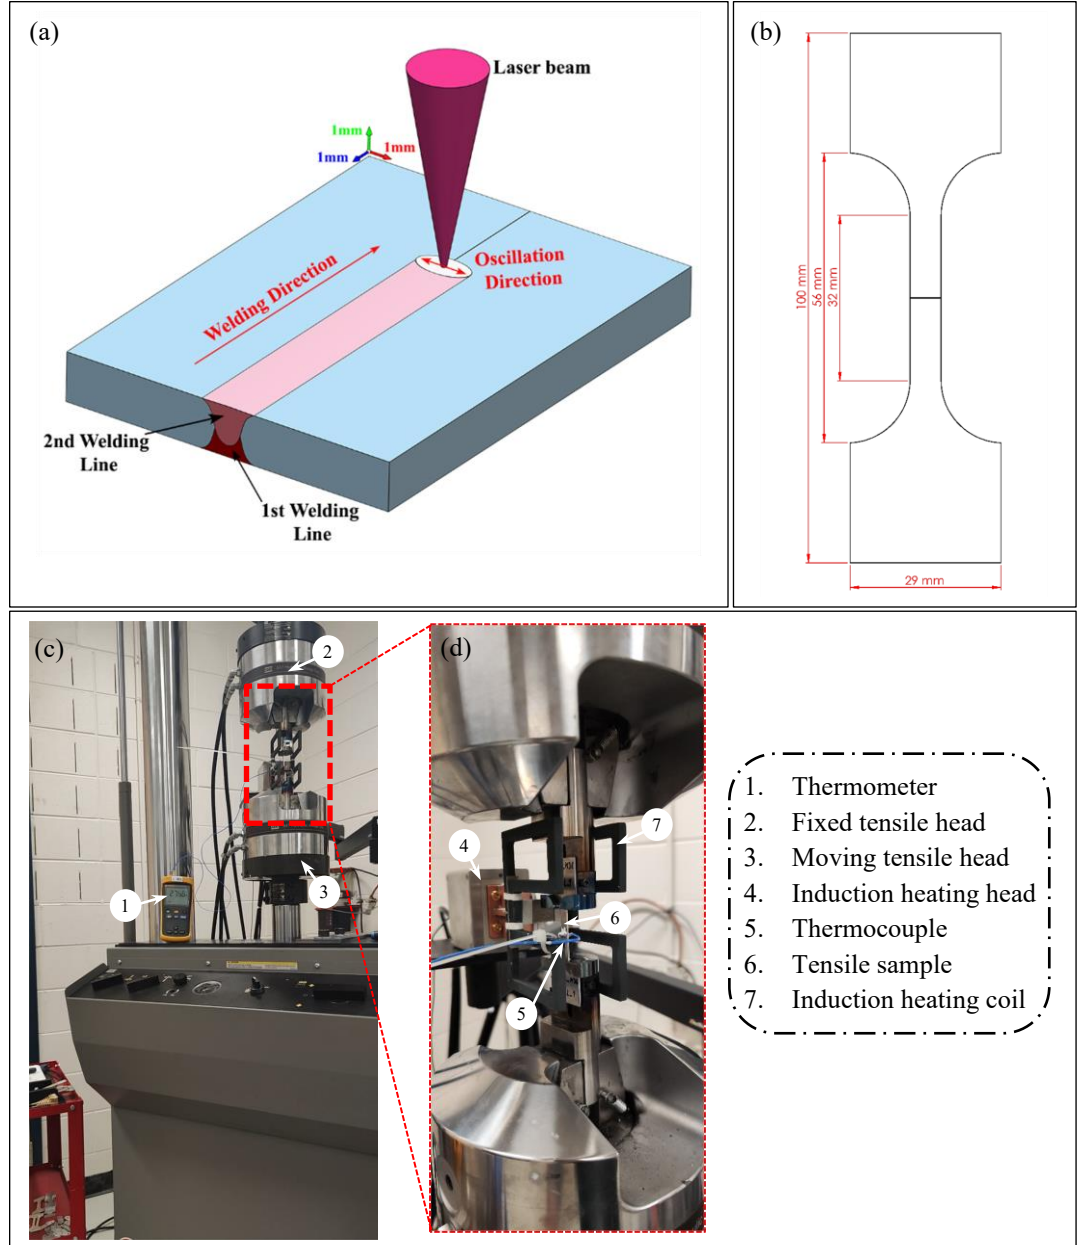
(a) Schematic of double laser-welded butt joint showing the weld configuration, weld direction, and the first and second laser pass, (b) Sample dimensions, (c) and (d) high-temperature tensile test equipment
